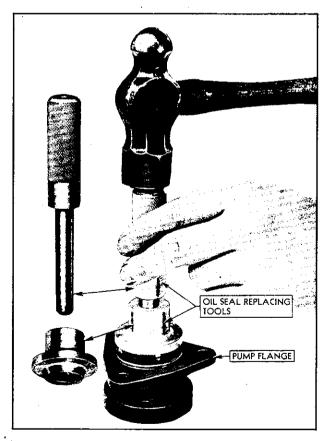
Installing Inner Oil Seal in Fuel Pump Flange with Tool J-1508-2.
